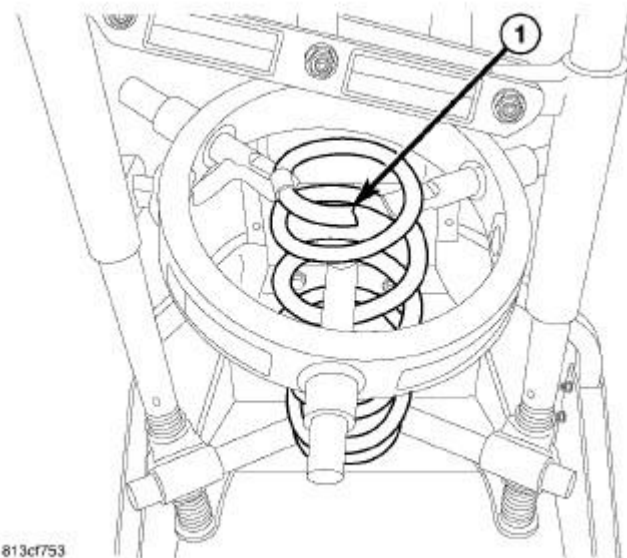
SPRING POSITIONED IN COMPRESSOR
